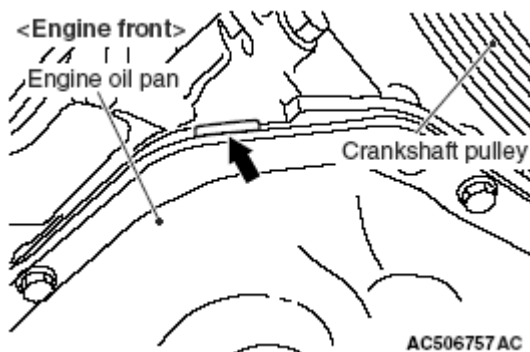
Inserting Special Tool MD998727 From Engine Oil Pan Removal Groove - Engine Front
